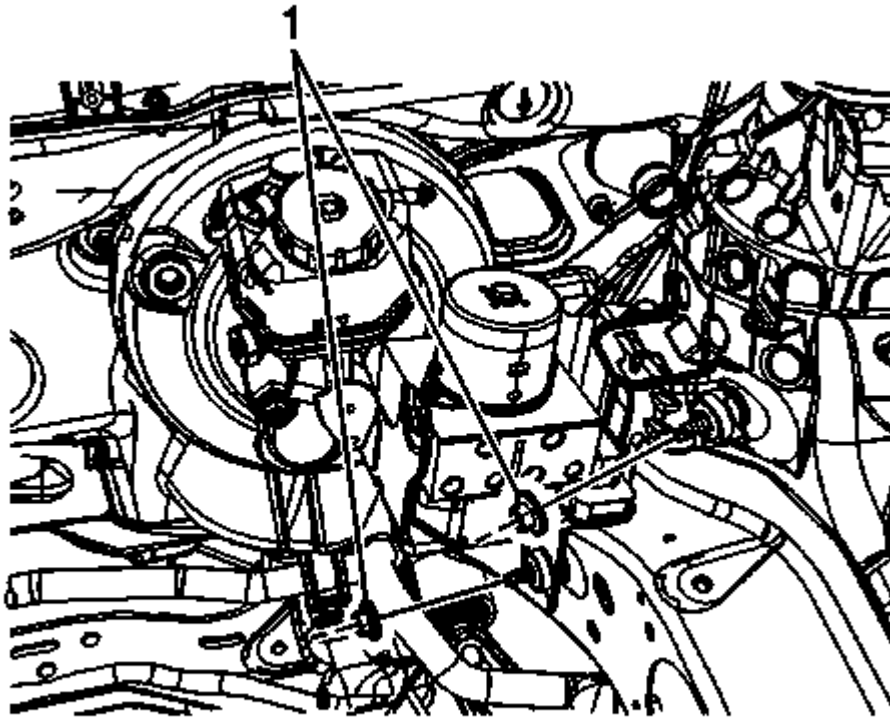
Brake Pressure Modulator Valve Assembly Nuts
